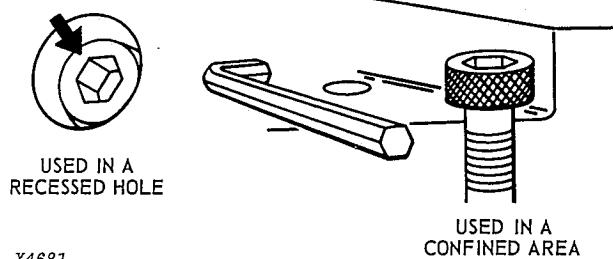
Hex Socket Head Cap Screws are Handy in Recessed Holes or Confined Spaces
